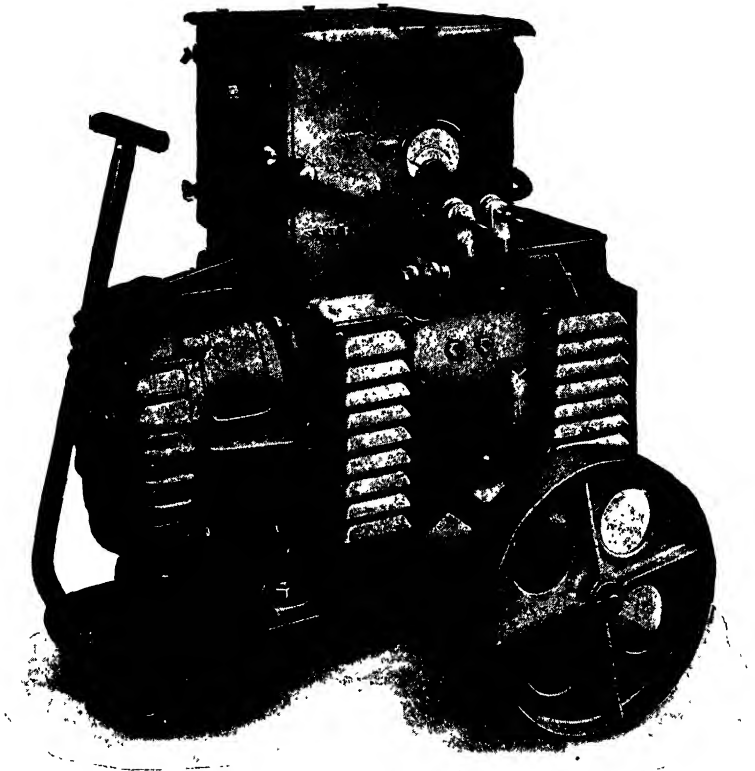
Portable single operator A.C. motor driven welding set
